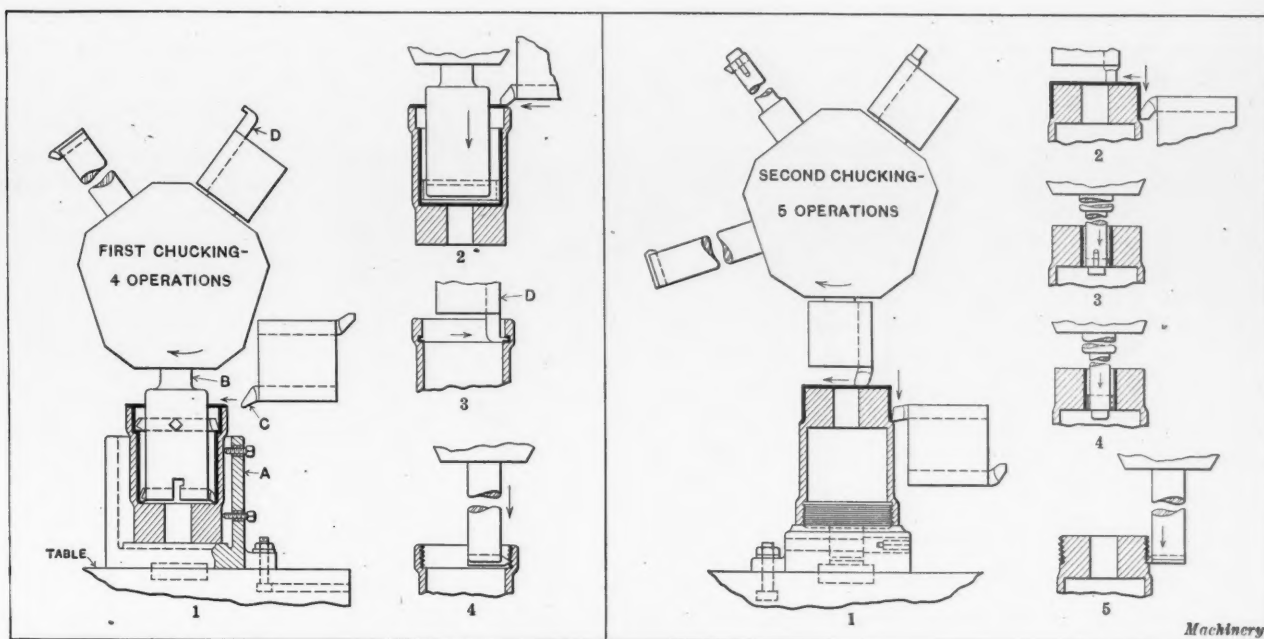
Tooling Lay-outs for machining a Turbine Section in Two Chuckings
